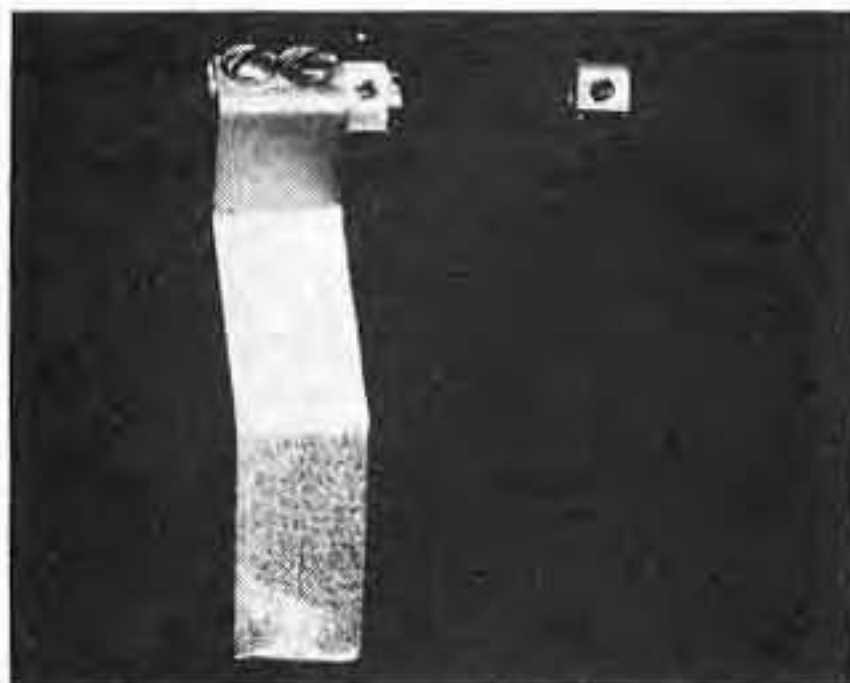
DETAILS OF HINGE used in finger-type end-effector assembly.
